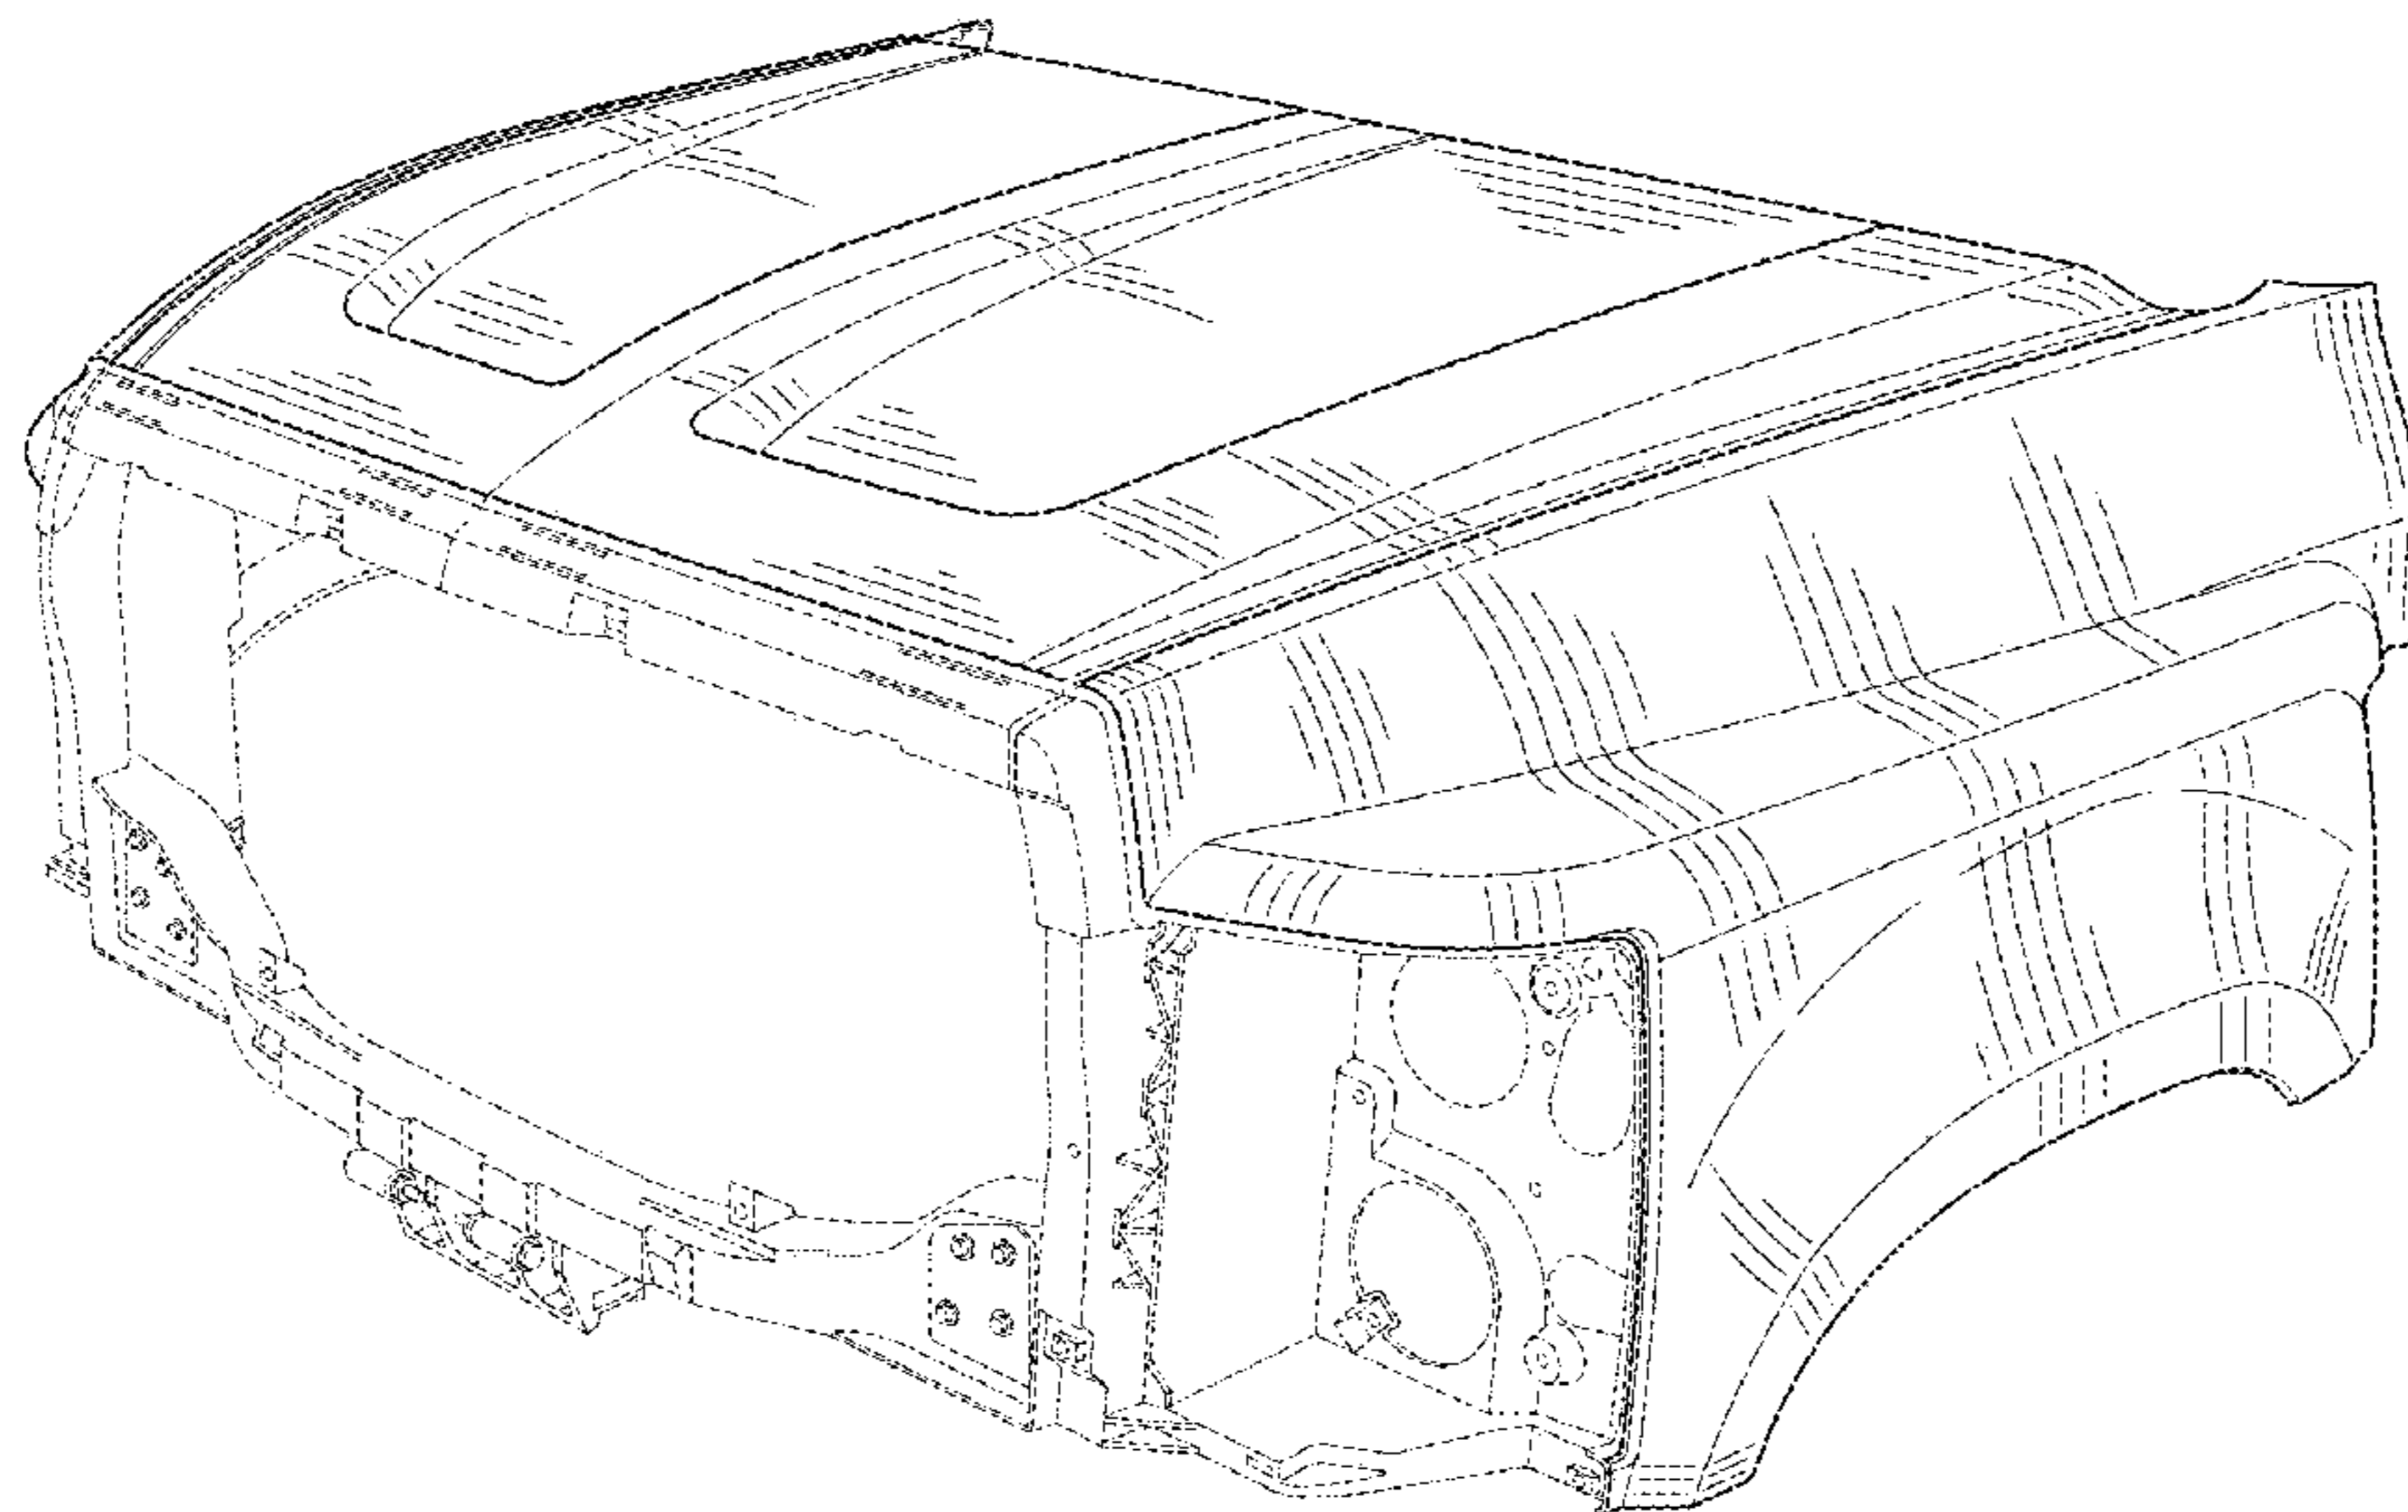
is a front, right perspective view of a vehicle hood assembly;
